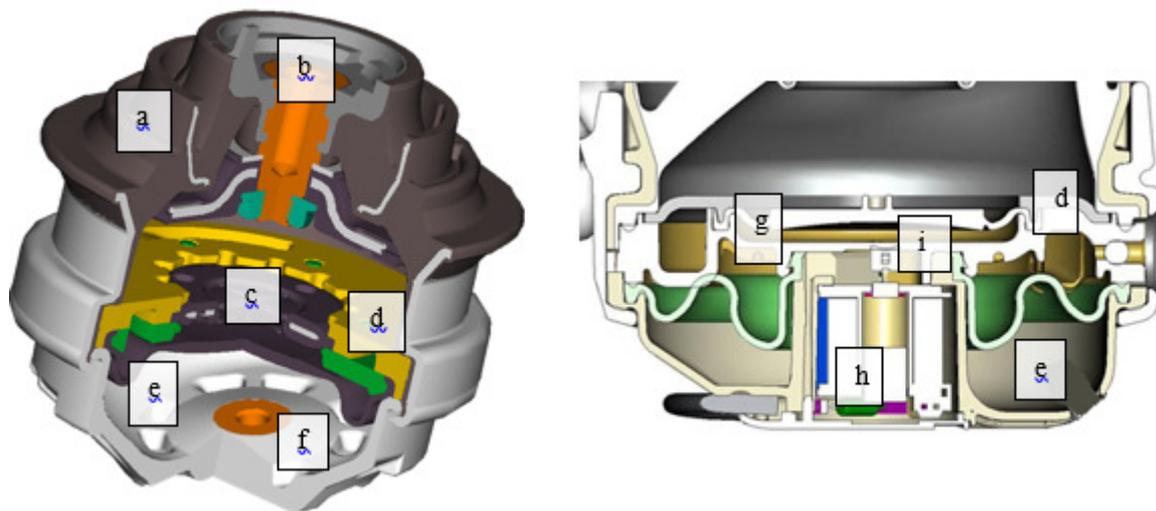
Sectional view of a conventional hydraulic engine mount: - LH: Design with main spring component (a), inner part (b), channel plate with lower compliance (c), channel plate (d), bottom compliance (e), housing including screwing (f) – RH: Switchable version with membrane and air chamber (g), tractive electromagnet (h) and lock with seal (i).
